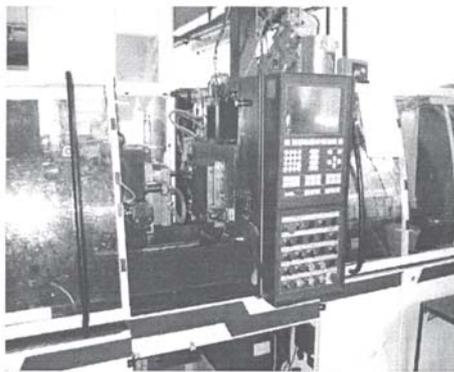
ENGEL CC 100 Type ES 80/50 HL injection machine
